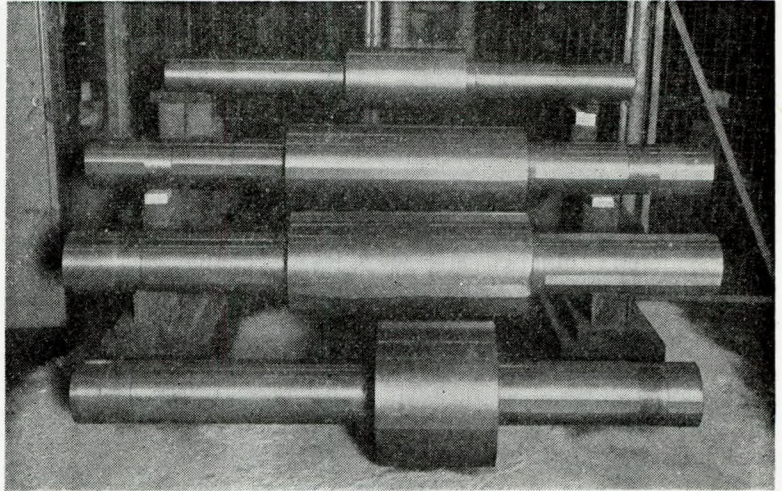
G.18B and R.20 solid gas-turbine rotor forgings for Sulzer Bros., Switzerland. (Three upper forgings G.18B). (Note machined flats for supersonic examination).
